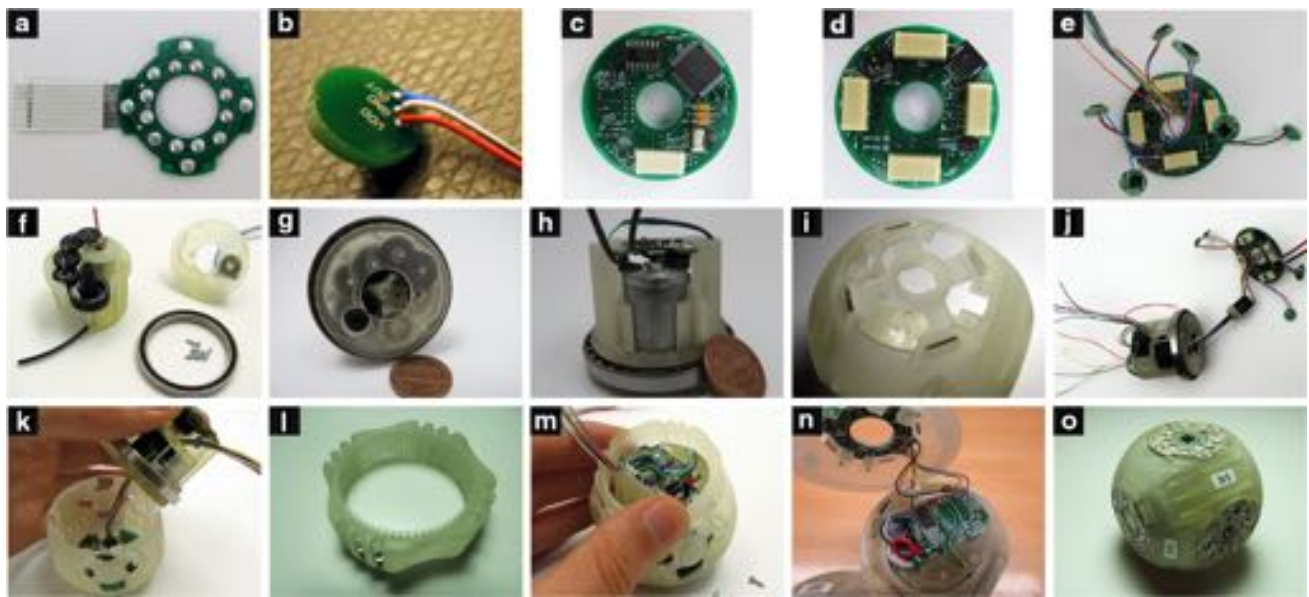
Components of the Soldercube actuation module. a Soldering connector with attached flat flexible cable connector. b Adjacency sensor PCB. c Main controller PCB, *top view* and d *bottom view*. e Main controller PCB with adjacency sensors and slip ring wires attached. f Gearbox components including Dynamixel DC motor, gears, and potentiometer, and bearing. g Top view of assembled gear box showing center channel for wires connecting the two modules halves rotating
